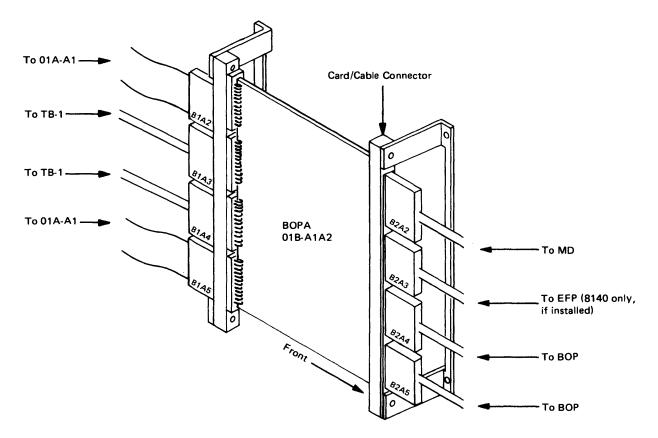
Basic Operator Panel Adapter Card (01B-A1A2)
